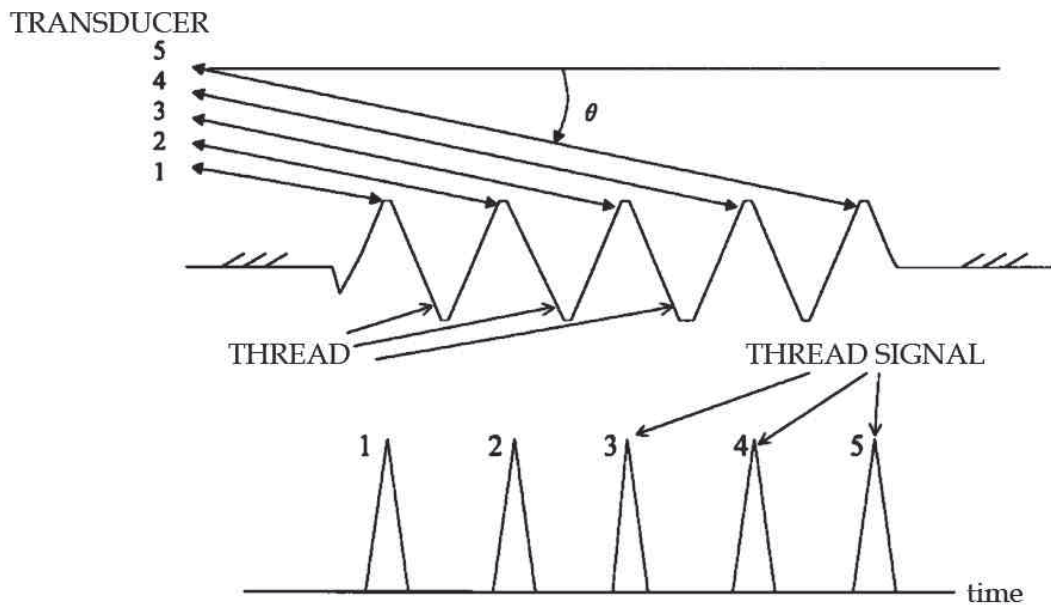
Ultrasonic inspection technique for bolts [3.3].
